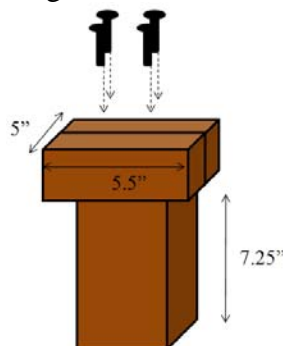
Lag bolts hold adapter wood to bottom of wheel leg
